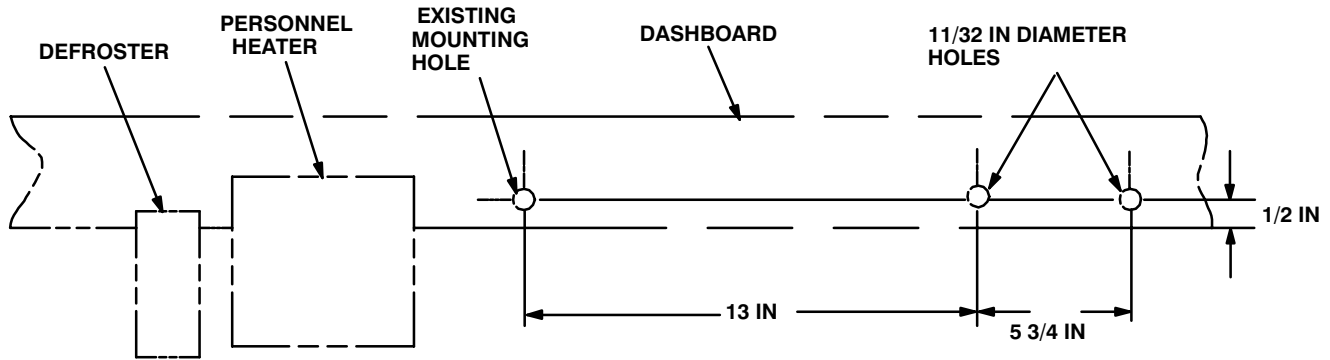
(1). Equipment Shelf and Speaker Installation: Drilling Dimensions
